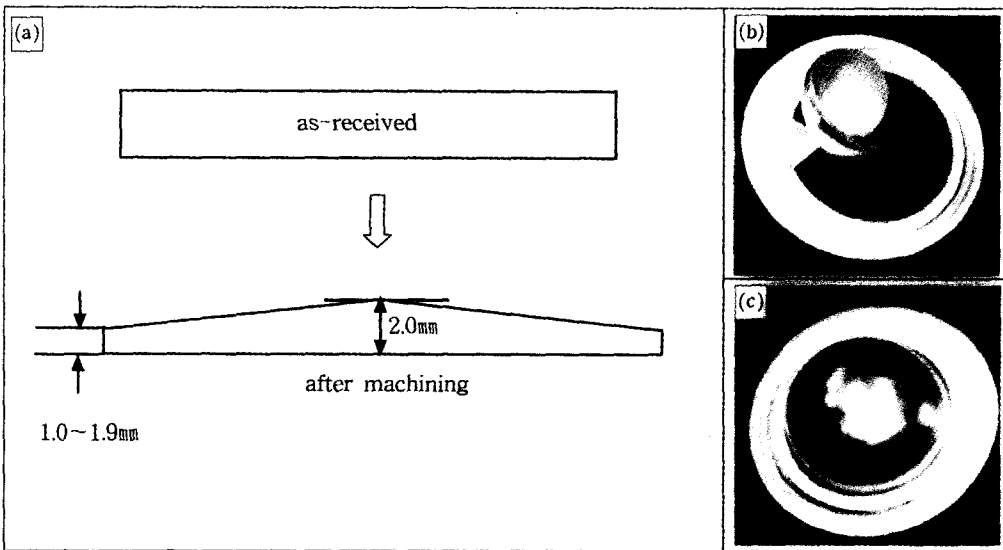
Thickness distribution of the machined sheet and appearance of superplastically formed parts
